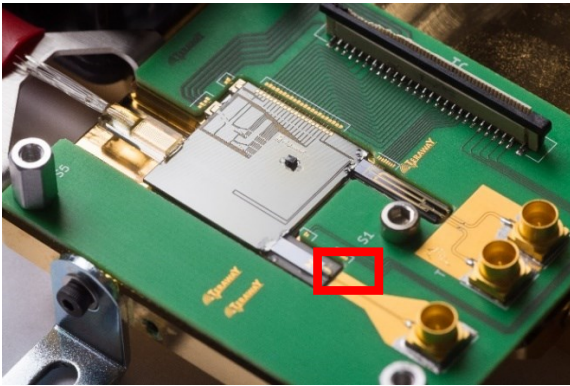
Full receiver assembly with TIA highlighted (red box)
